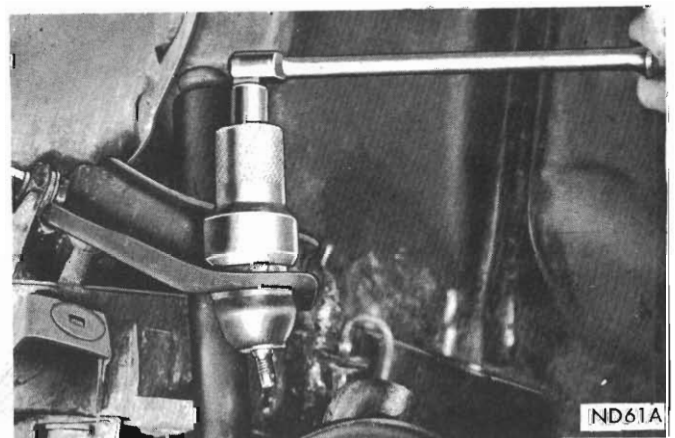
Removing or installing upper ball joint using Tool E2C15B
